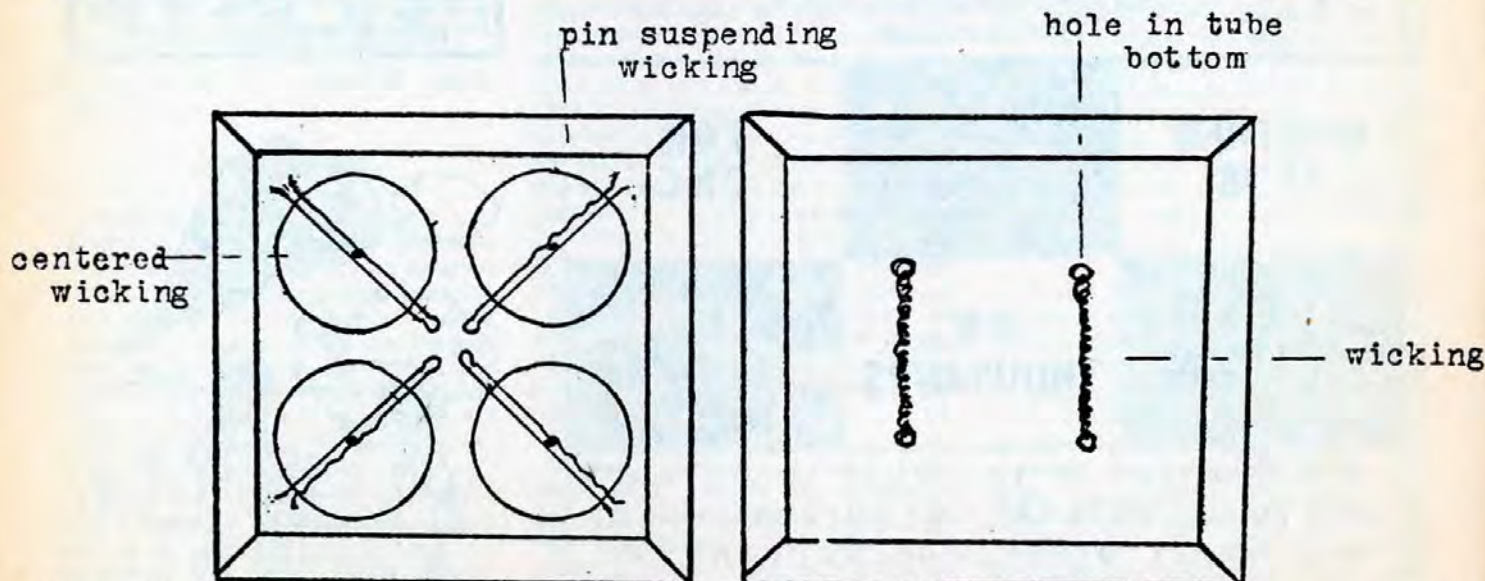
Top view of candle mold showing positioning of wicking on pins.
